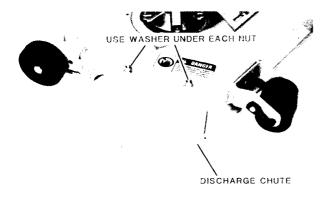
Install Discharge Chute (37 in./94 cm Mower) INSTALL LEVELING ROD
